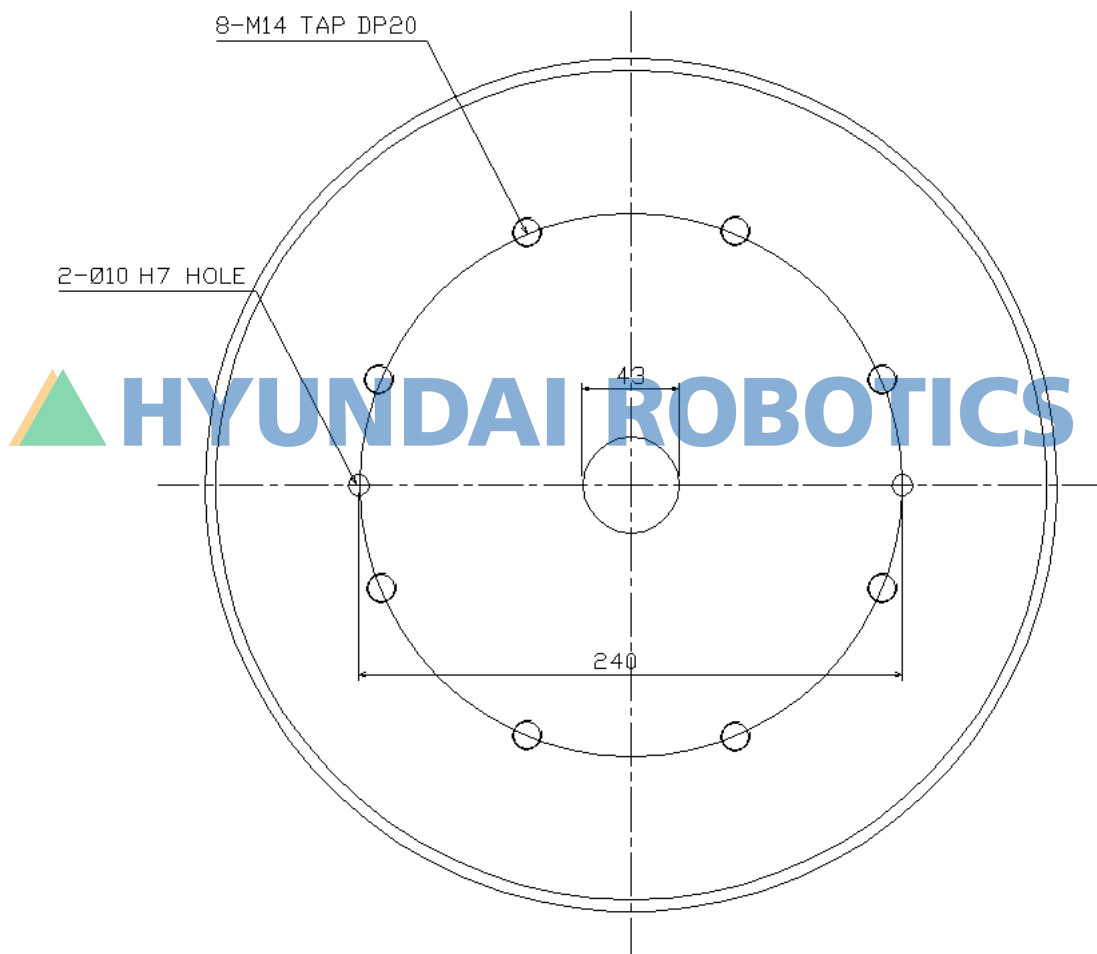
Detailed Drawing of the Mechanical Interface Attachment Surface
